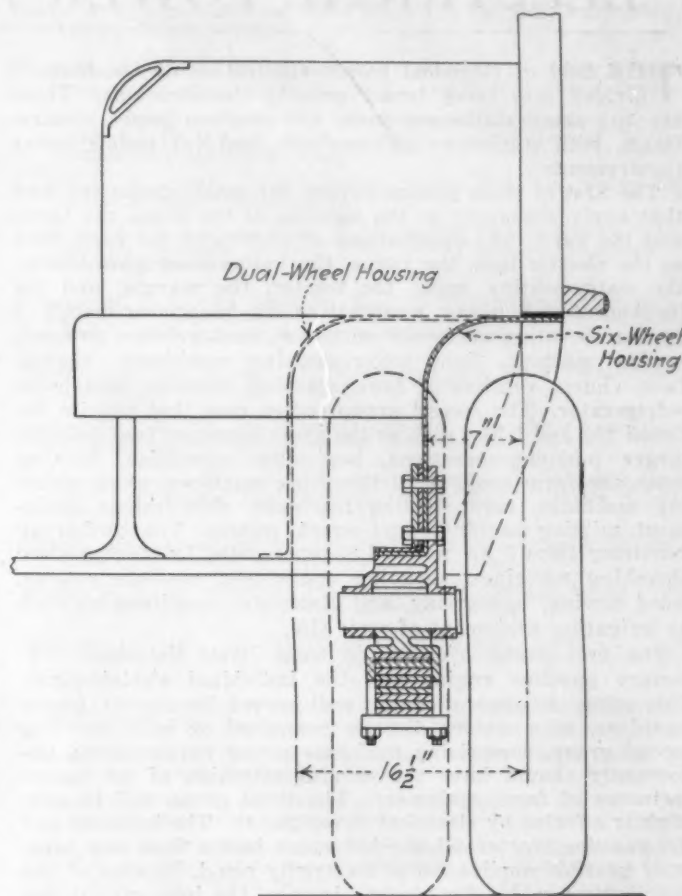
COMPARATIVE OBSTRUCTION OF WHEEL HOUSINGS ON DUAL-WHEEL AND SIX-WHEEL MOTORCOACHES
